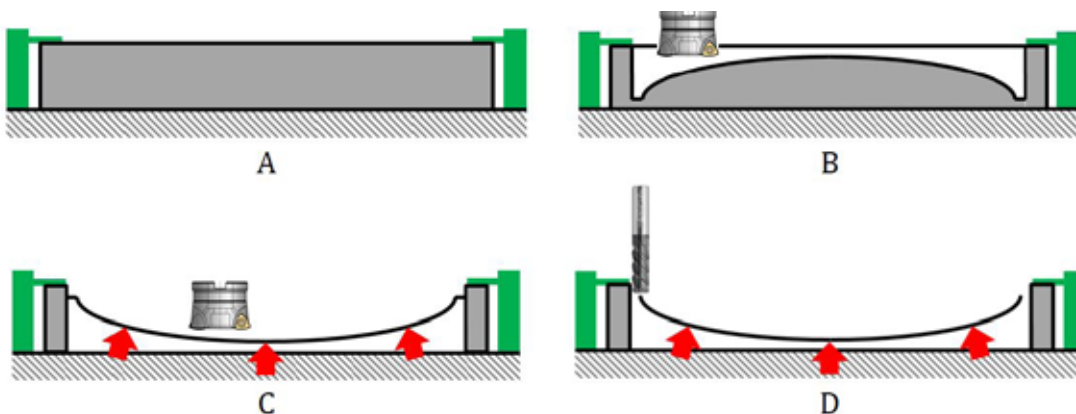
Main Machinig steps: clamping of the raw part; machining of the top side; machining of the bottom side; cut-off of the workpiece from the auxiliary frame
